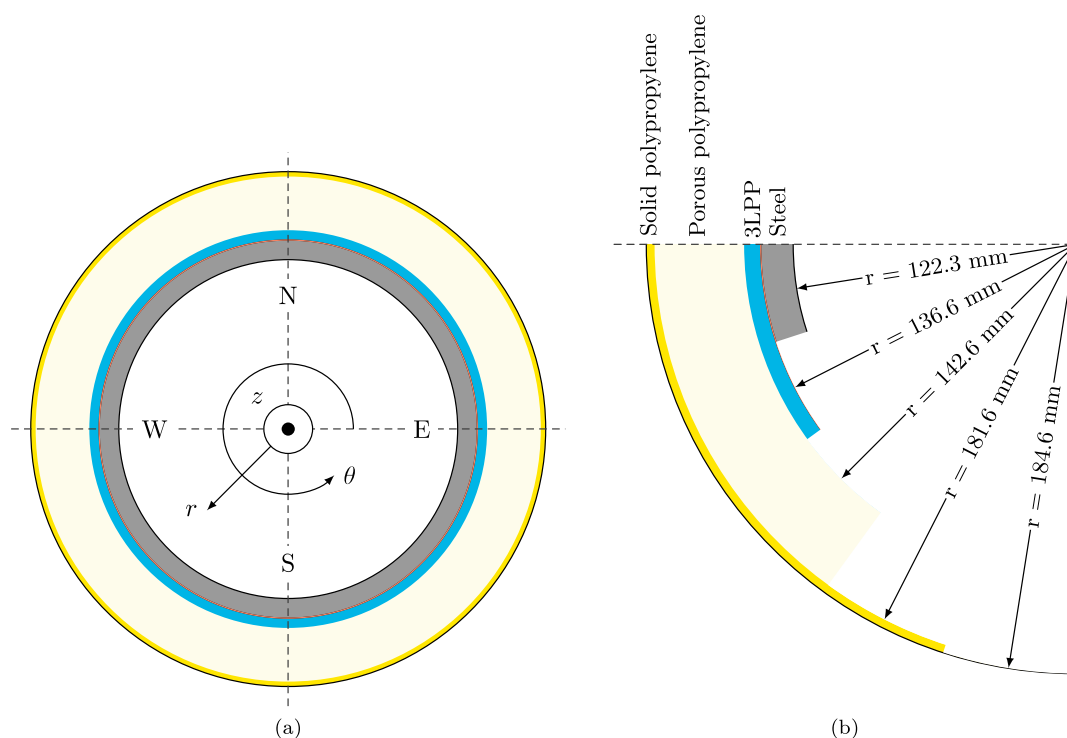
Illustrations of (a) the full pipeline cross-section and (b) a quartile cross-section view with radial measurements of the various layers relevant to this work.
